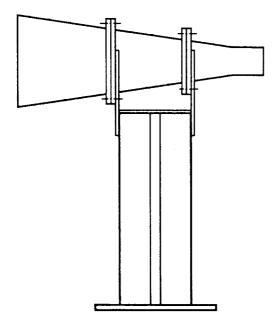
ASSEMBLY DRAWING FOR THE CORRUGATED HORN AND THE REFLECTOR FEED MOUNT.
